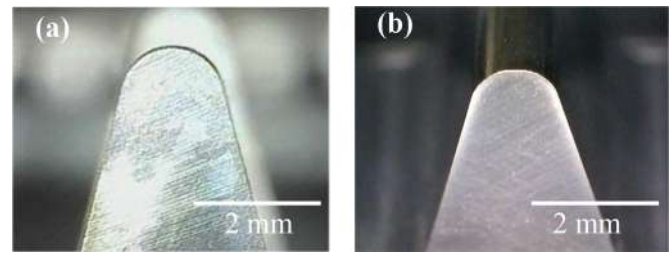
Optical images of tool tips of two hob cutters after hobbing ten gears: (a) 65 mm cutter, (b) 130 mm cutter.
